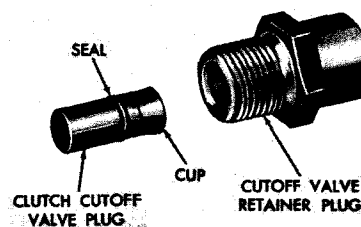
Clutch cutoff valve plug and associated components (hydraulic type)—later model
